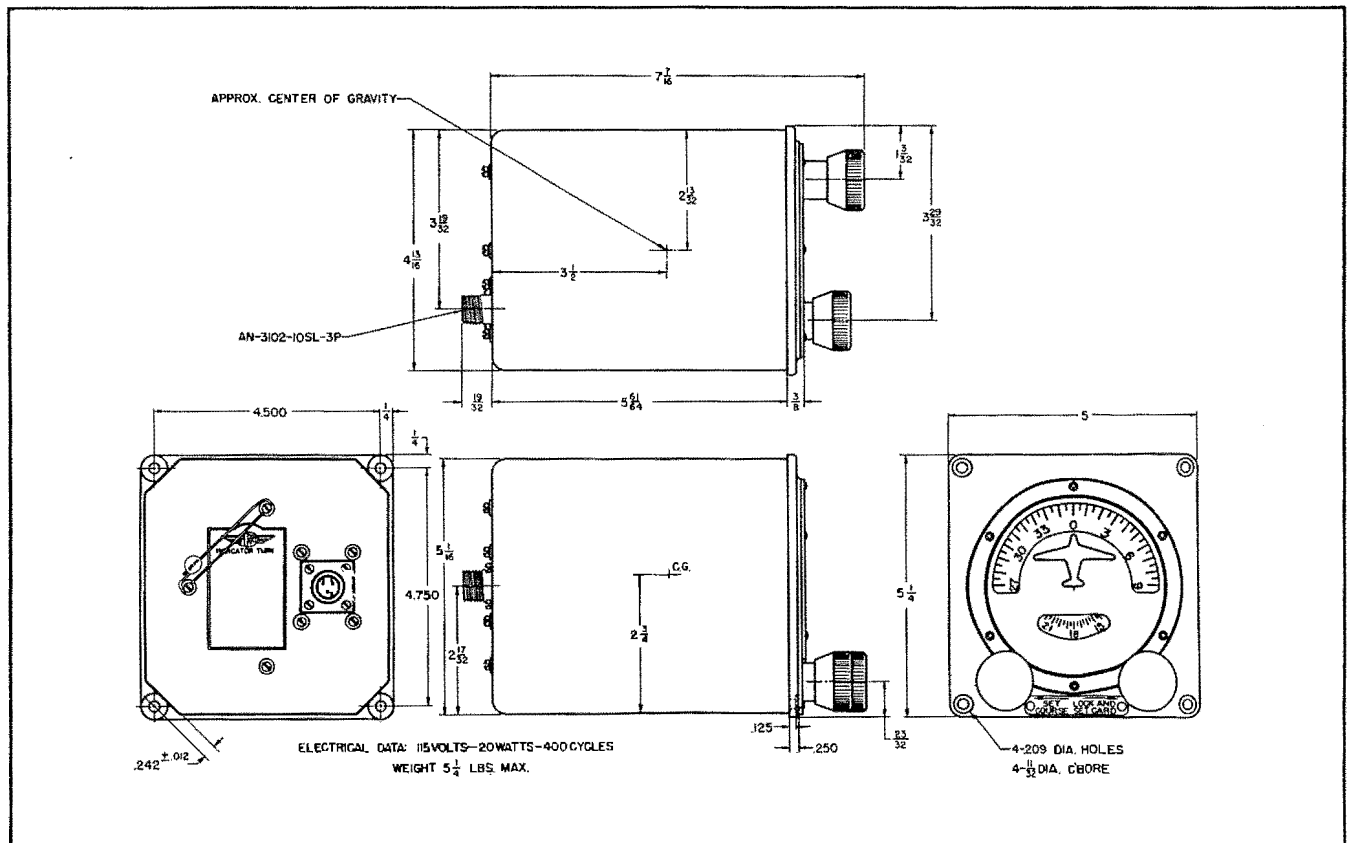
Outline Drawing (AF Type C-1 Indicator, Sperry Part No. 657069)
